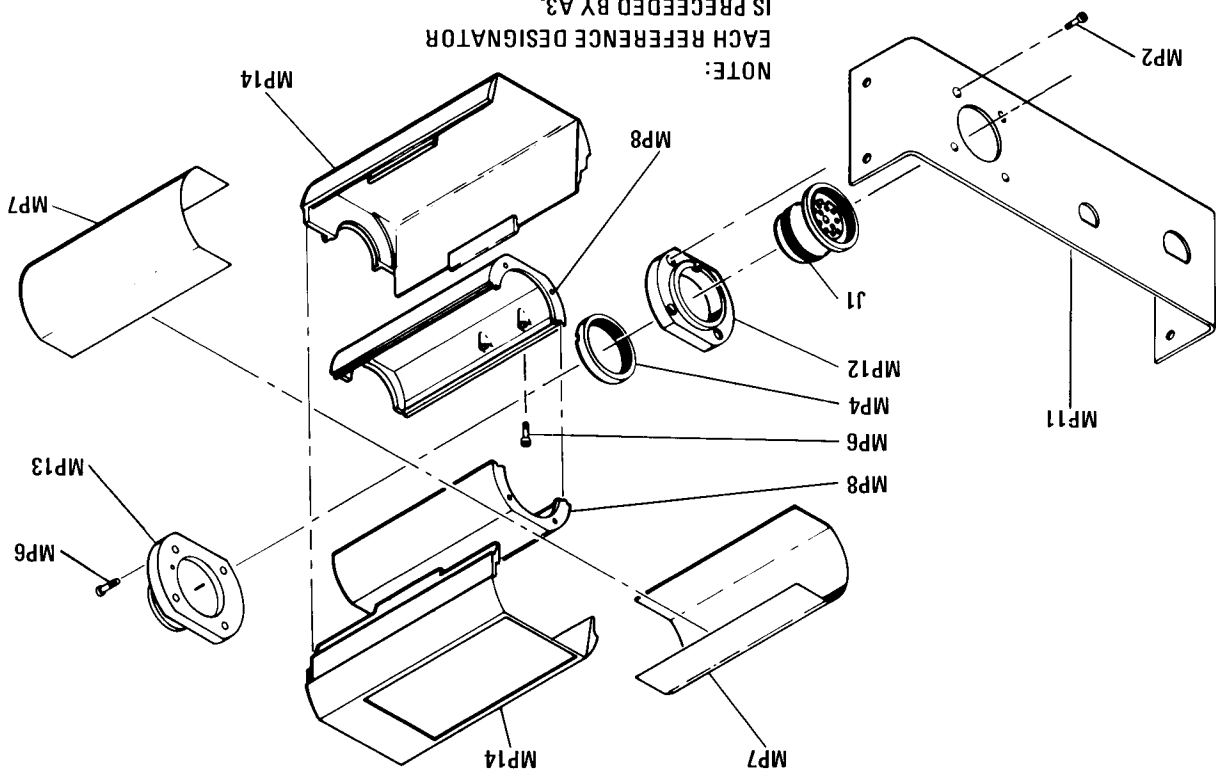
A3 ASSEMBLY EXPLODED VIEW
